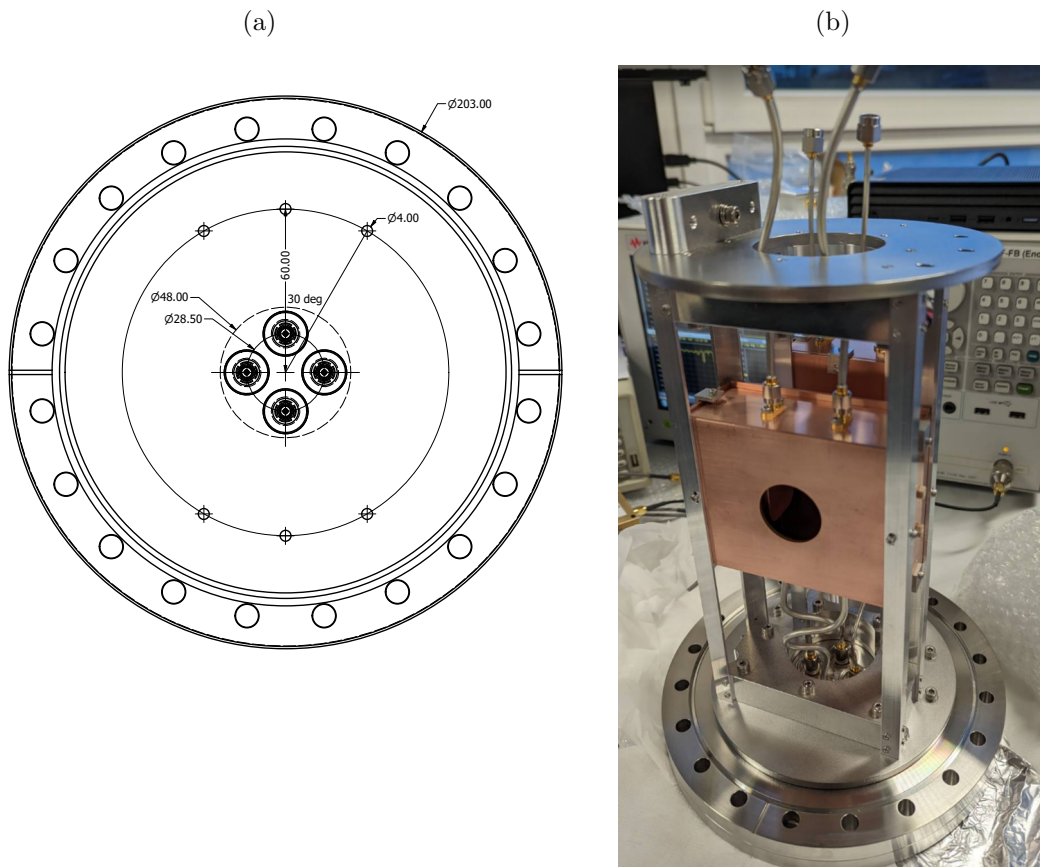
(a) 2D drawing of the 4 channel SMA feedthrough and (b) how the support is mounted on the feedthrough.
